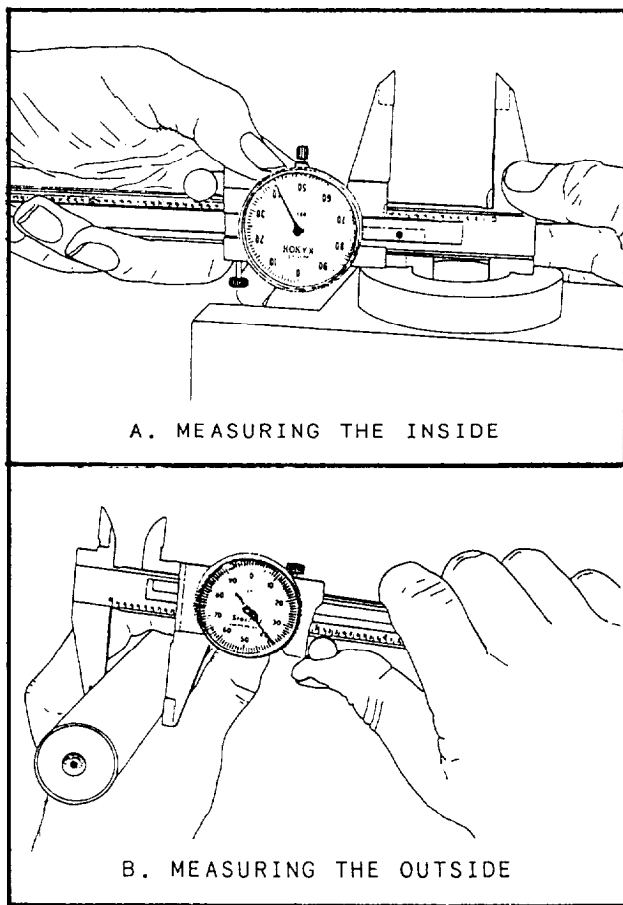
Measuring (A) inside and (B) outside diameters with a dial/vernier caliper.
